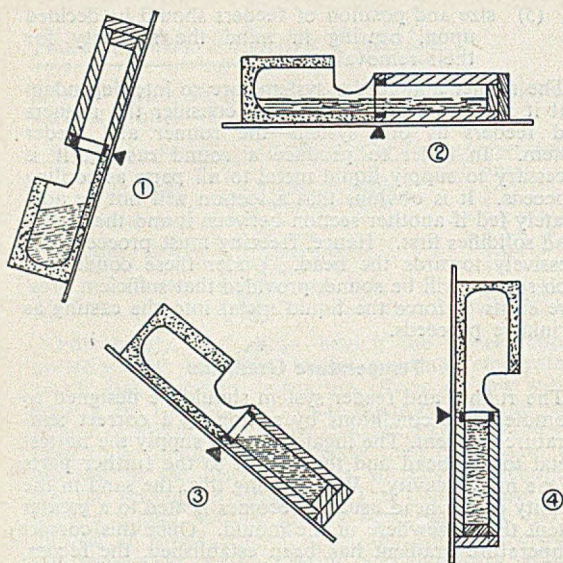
STAGES IN THE DURVILLE METHOD OF CASTING.
